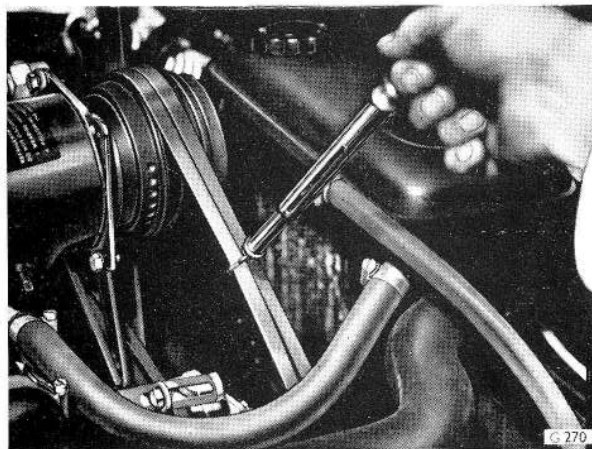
CHECKING TENSION OF ALTERNATOR BELTS
